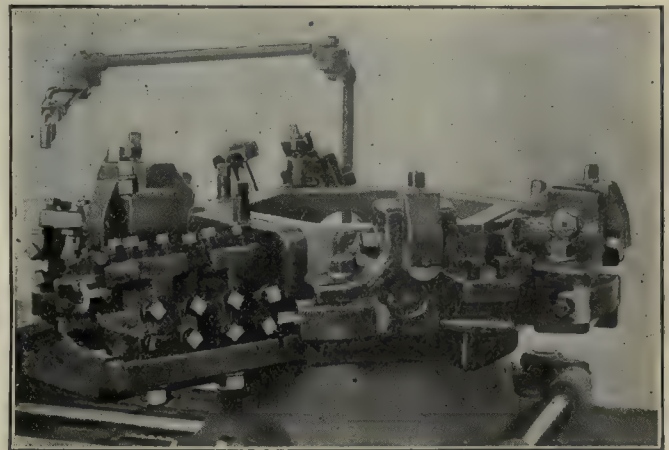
HEXAGON TURRET WITH BOX TOOLS
